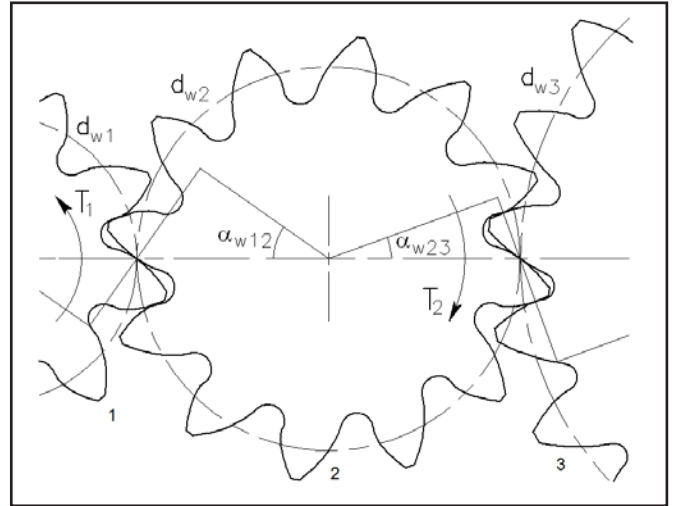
Chain gear arrangement: 1=input pinion; 2=idler gear; 3=output gear.
